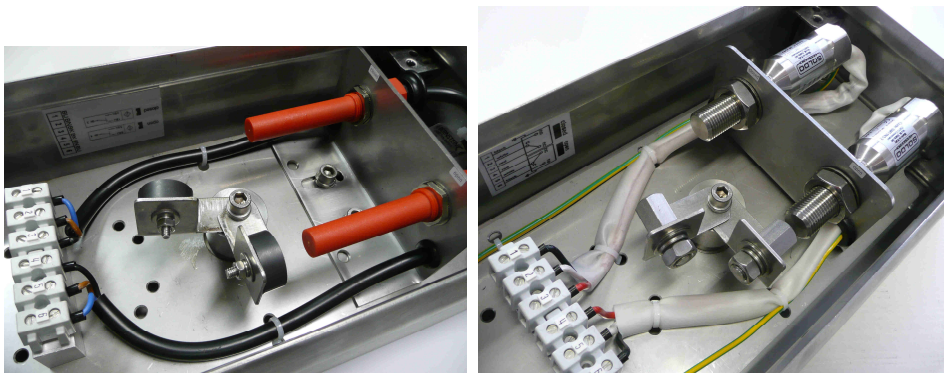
+5: possible versions of limit switches: Bernstein-Reed limit switches with silver coated contacts or Soldo-Reed limit switches with gold coated contacts, adjustable switching cams with mounted magnets
